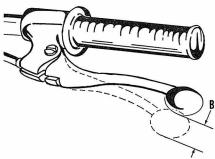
Clutch hand lever should have 3/8-5/8 in. free play at B.
